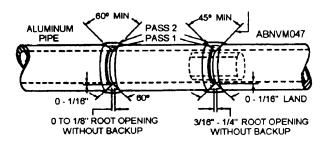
Joint design and weld pass sequence horizontal fixed-position multipass (GTA) welding.
